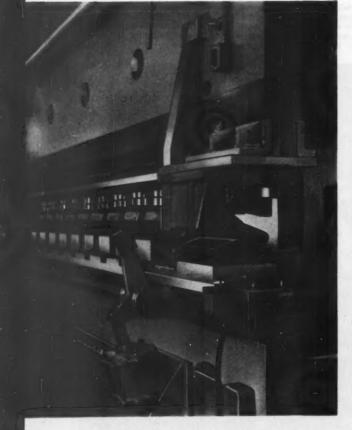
Combination punching and cut-off die set up on a 1000-ton press brake for the production of 5/8-inch thick, high-carbon steel road scraper blades
